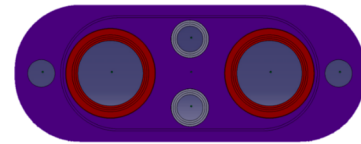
Cross section of the pipe flange for the initial threaded connection concept.
